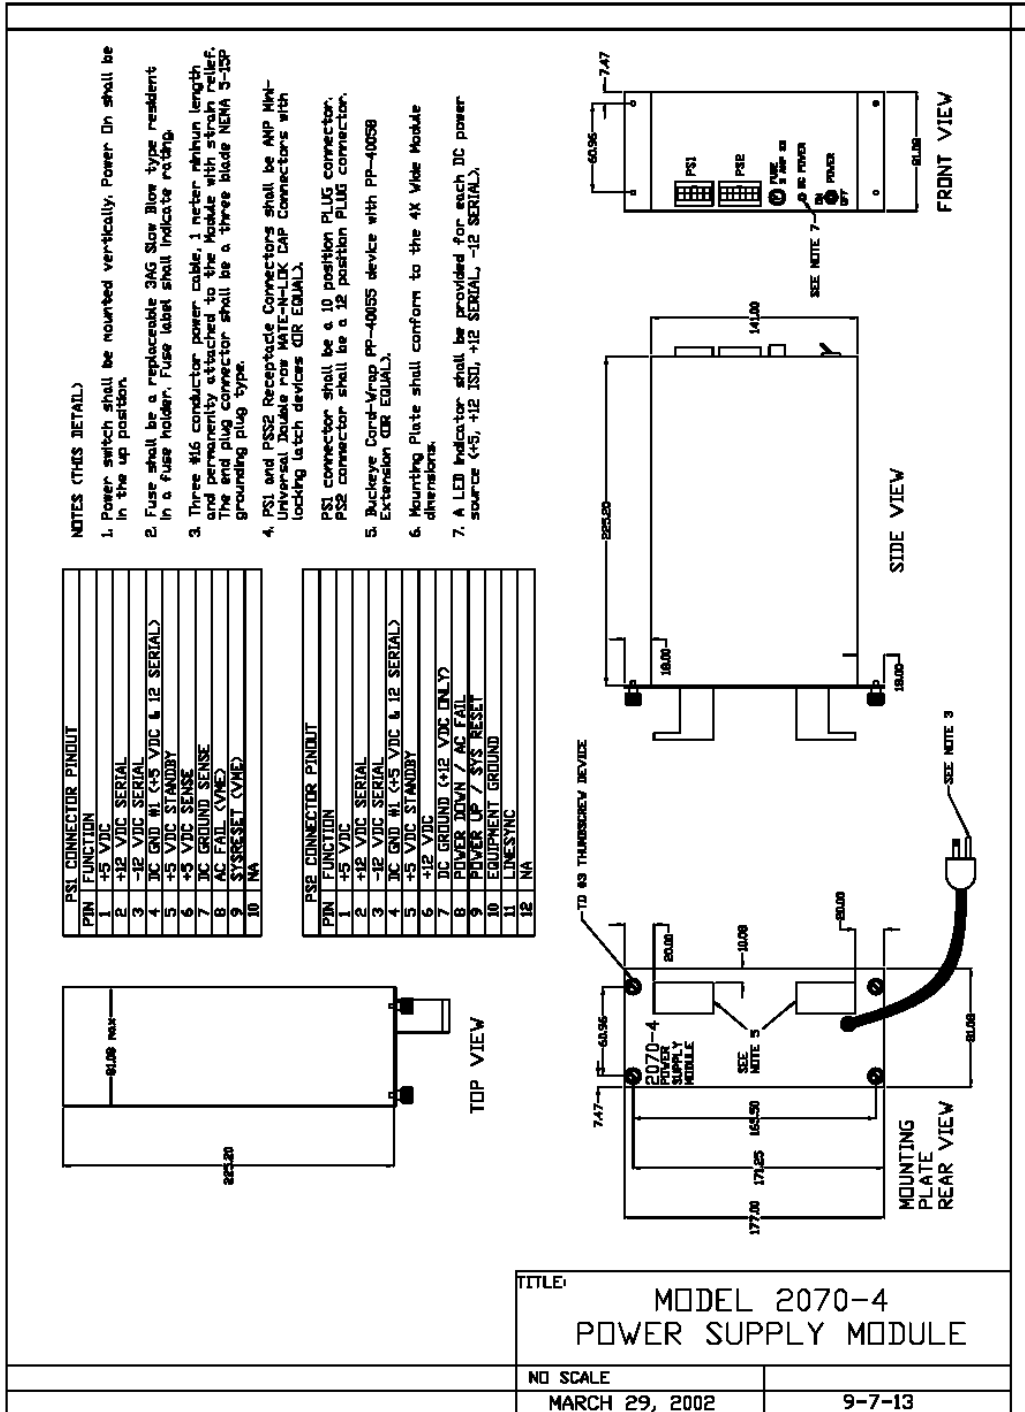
TEES DRAWING 9-7-13 Type 2070-4 Power Supply Module
